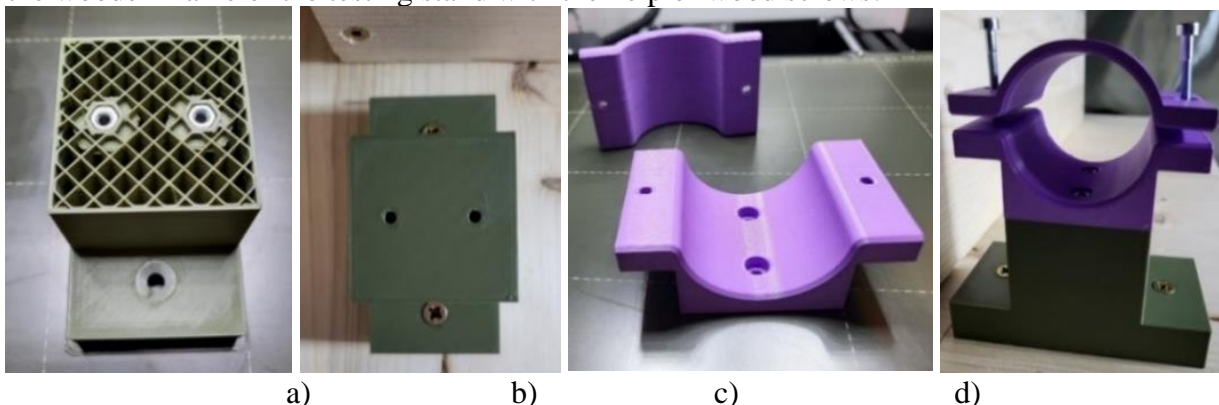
Motor support V2: a) Embedding nuts in the fixed part; b) Mounting of the fixed part; c) Mobile part; d) Assembly of the motor clamping-fixing system of the stand.
